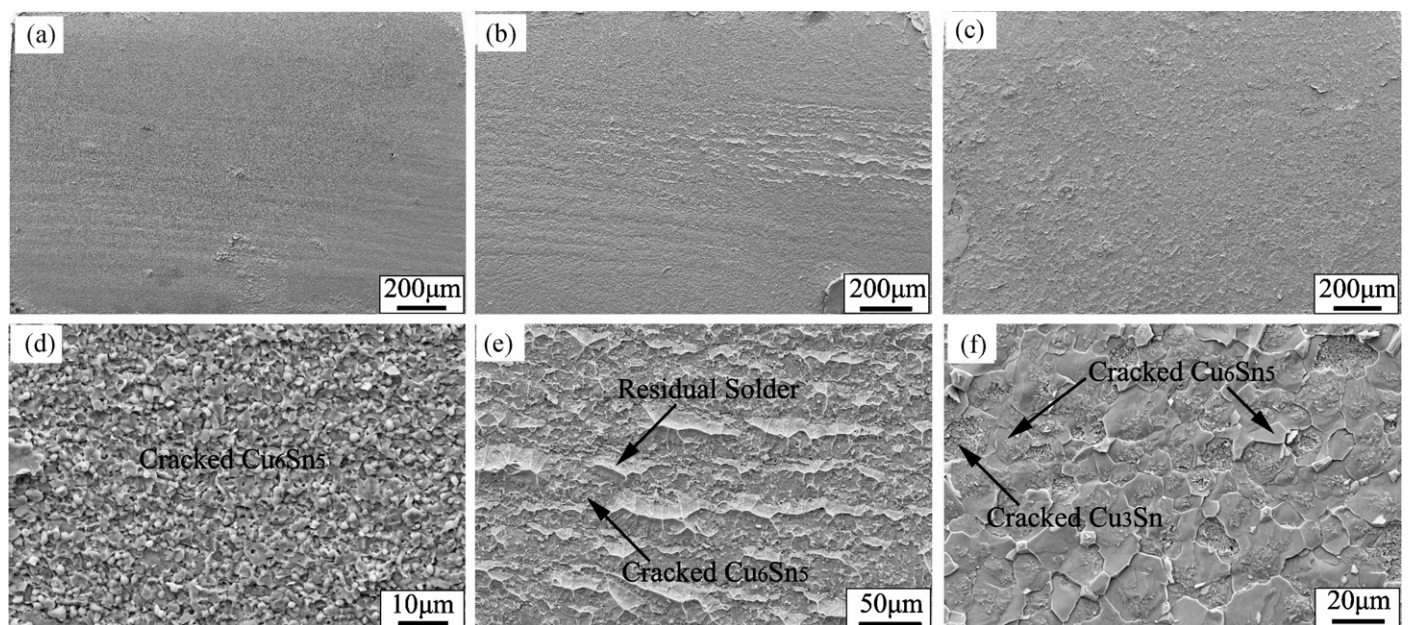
Fracture surfaces morphologies of solder joints at the strain rate of $1.25 \times 10^{-1} \text{ s}^{-1}$: (a) macroscopic image of as-soldered sample and (b) samples aged for 16 h and (c) 400 h; (d) microscopic image of as-soldered sample and (e) samples aged for 16 h and (f) 400 h.
